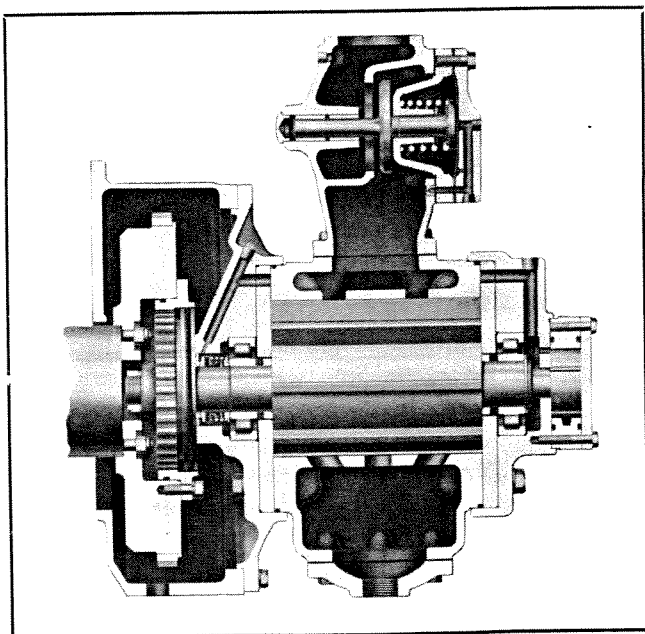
Cross-sectional view of Gyro-Flo Single Stage Compressor.
